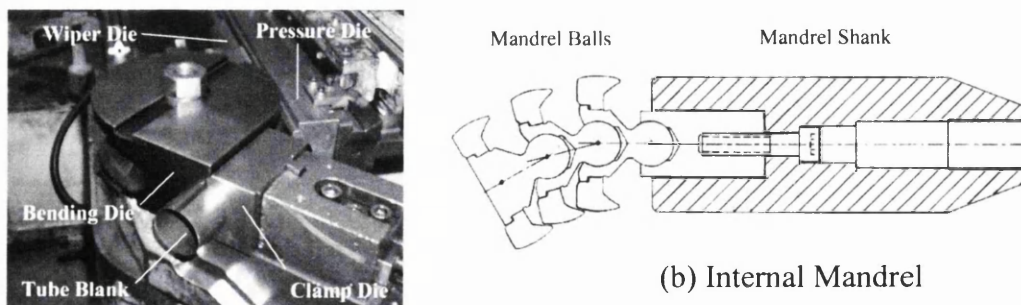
(a) Photograph of CNC Rotary draw bending tools and (b) internal mandrel
